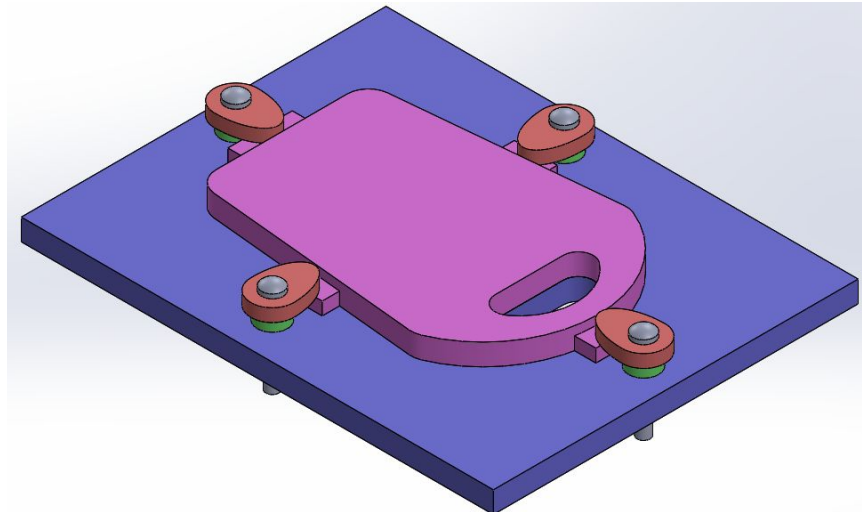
Initial design of oral cavity mount, created in Solidworks.
